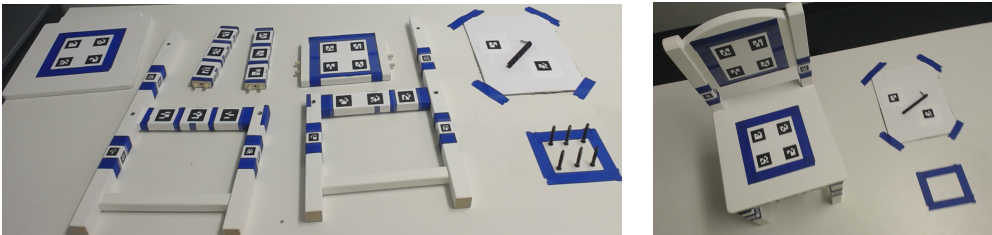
LEFT: IKEA parts before assembly. RIGHT: Assembled IKEA chair.
